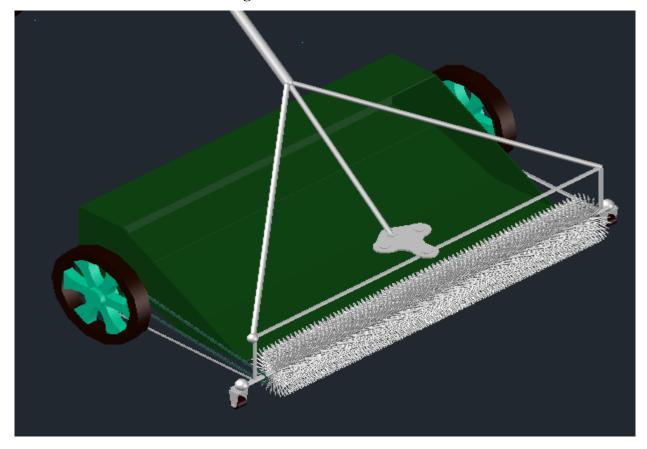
MOUNTED GARBAGE CLEANER (SW ISOMETRIC)
